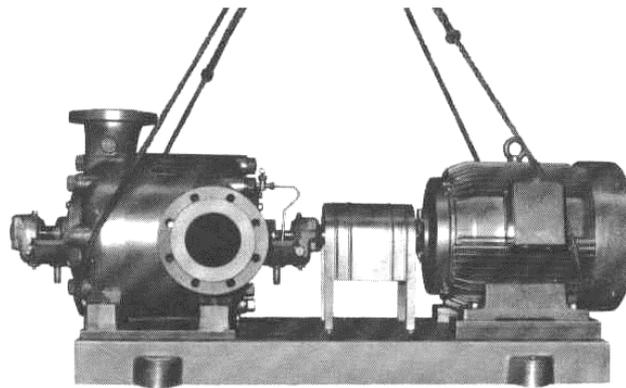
Slings the ropes under the pump and driver mounted on a combined baseplate
